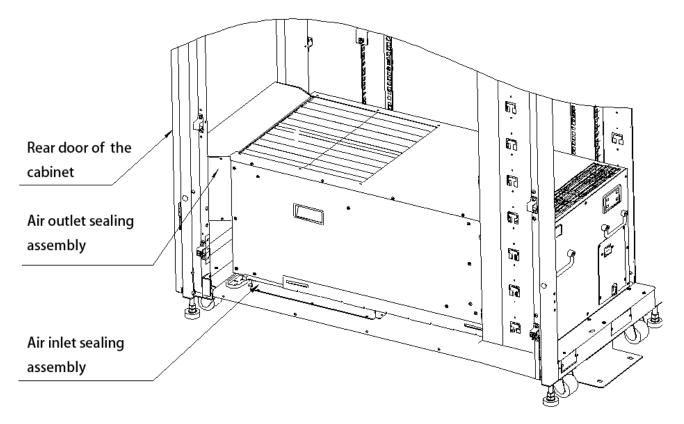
Diagrammatic Sketch of Air Outlet Sealing of External Circulation
